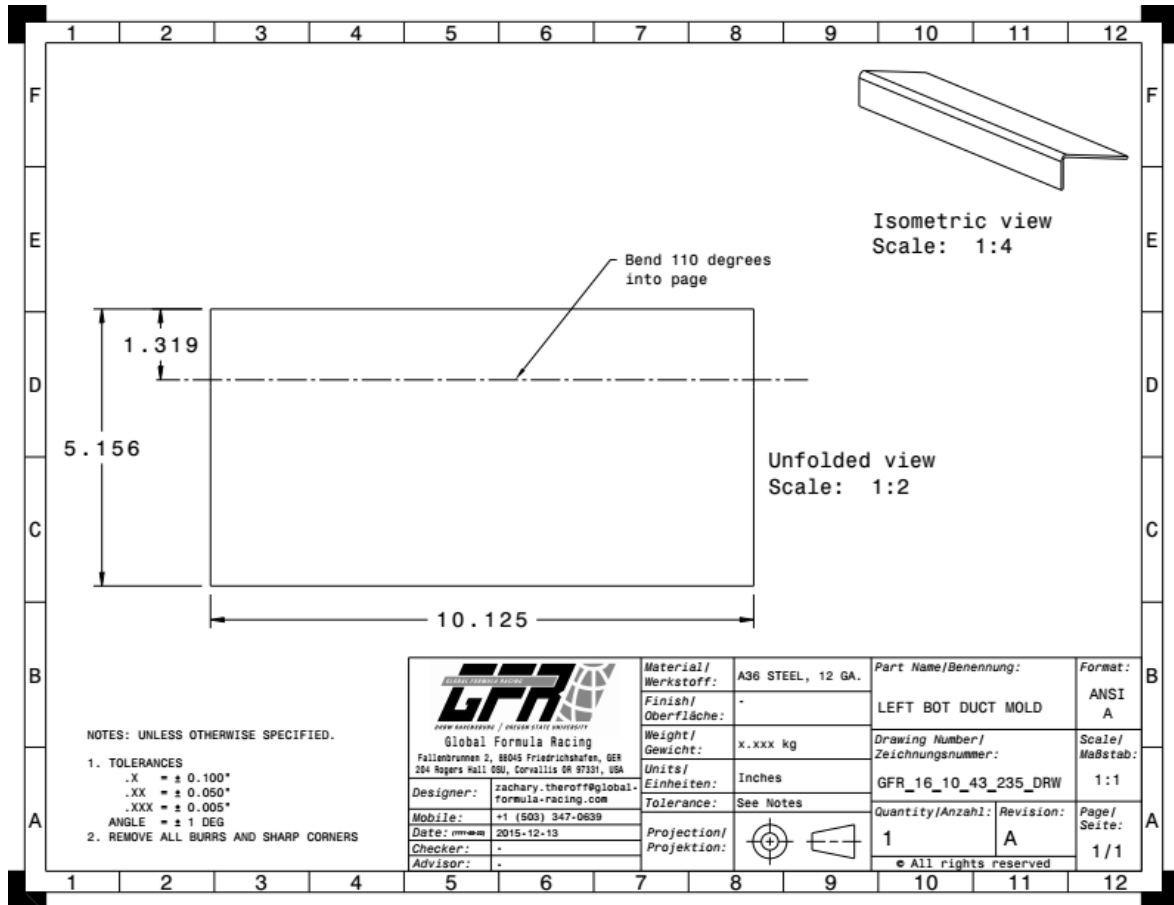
Left bottom duct mold; longer version of the right bottom duct mold.
